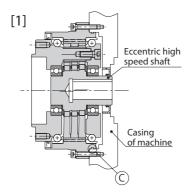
Assembly procedure A series F2C type (assembly example 2)
